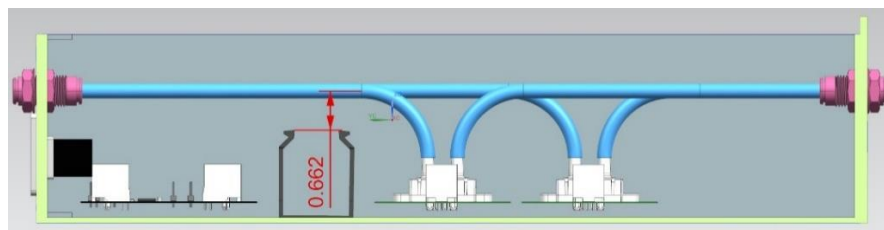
Profile view of the final version of the Gas Flow Sensor chassis
